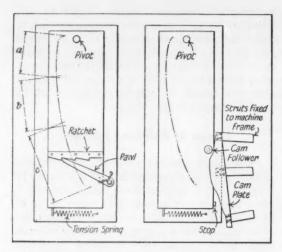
Two trailer type conforming fixtures having spring-loaded pivoting plates. On the fixture at left, pawl and ratchet arrangement positions work, while cam is used on fixture at right.
